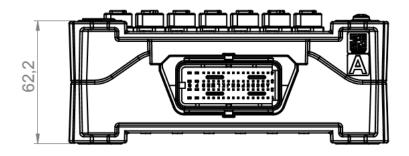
Dimensions of the digsy $\ensuremath{\mathbb{B}}$ fusion housing – SMALL – side view
